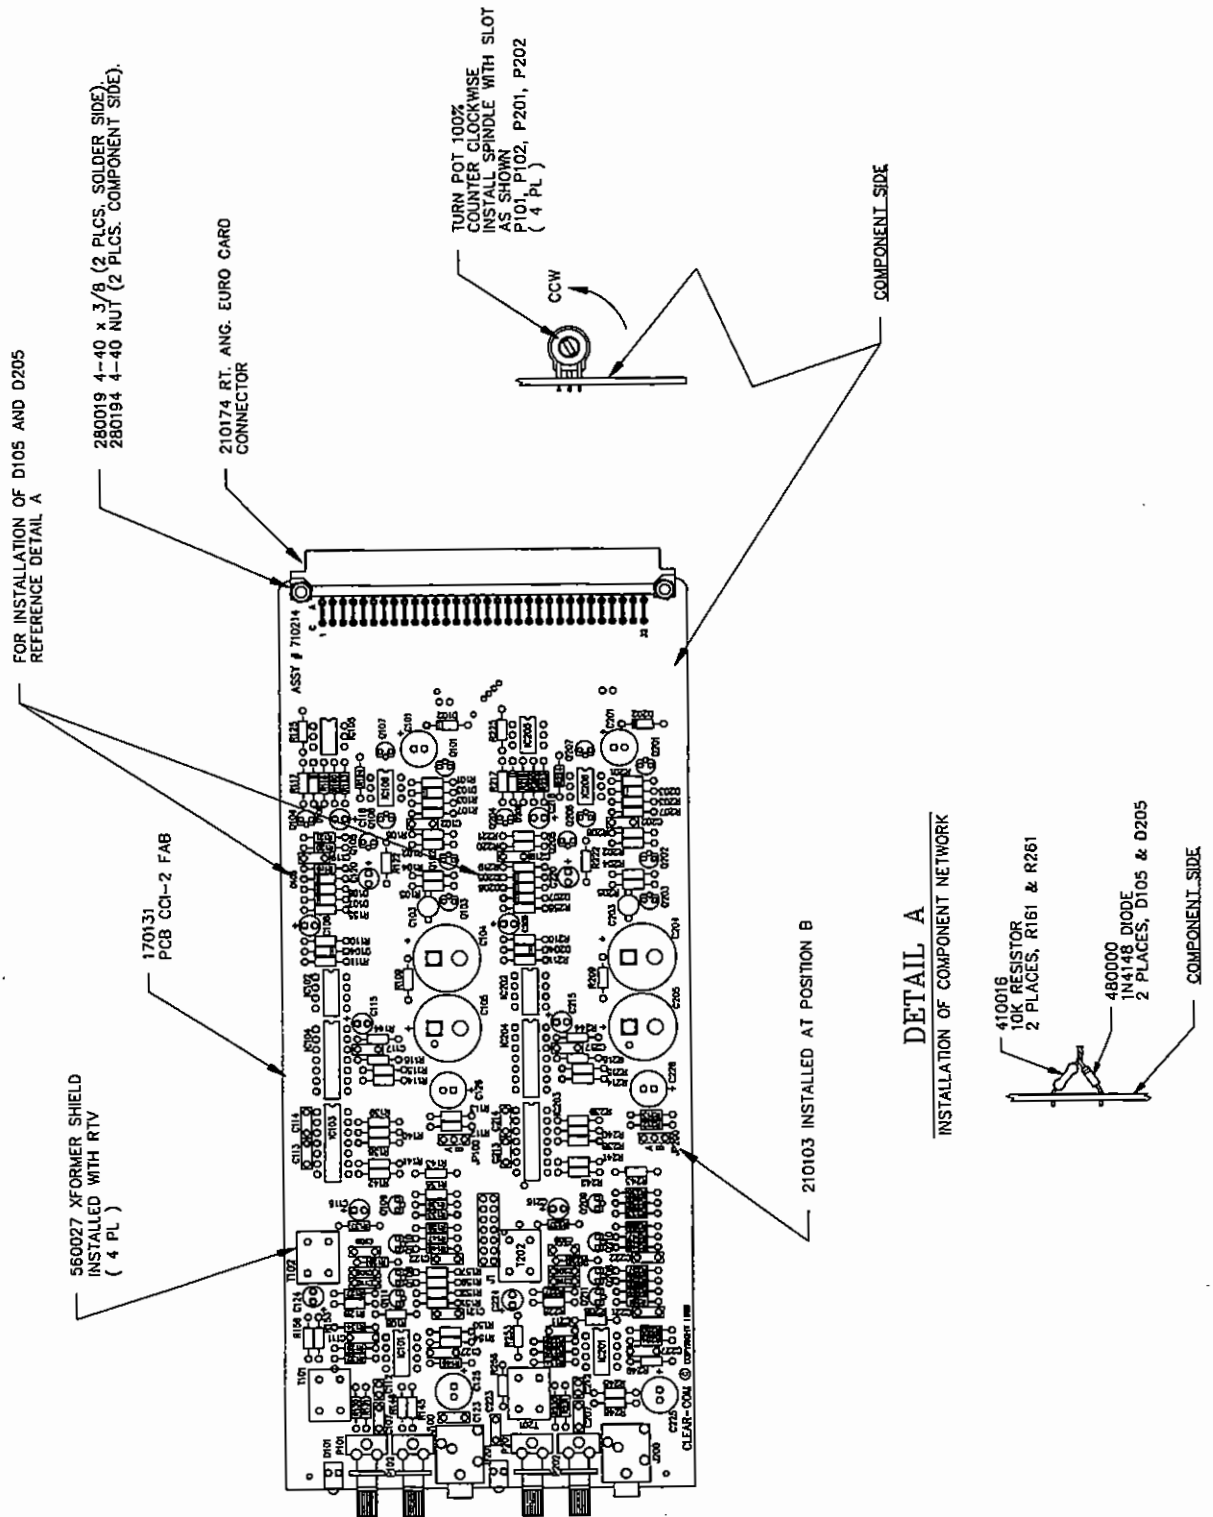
Assembly Drawing - CCI-22 Main PCB, Rev. D
